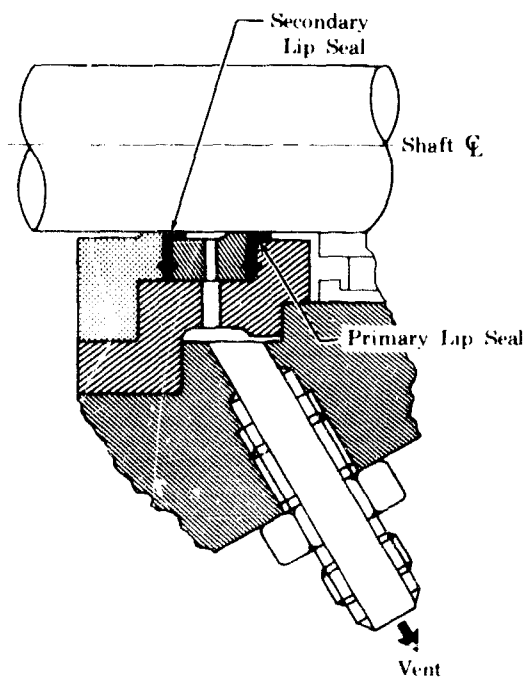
Main Chamber Oxidizer Valve Shaft Lip Seals
